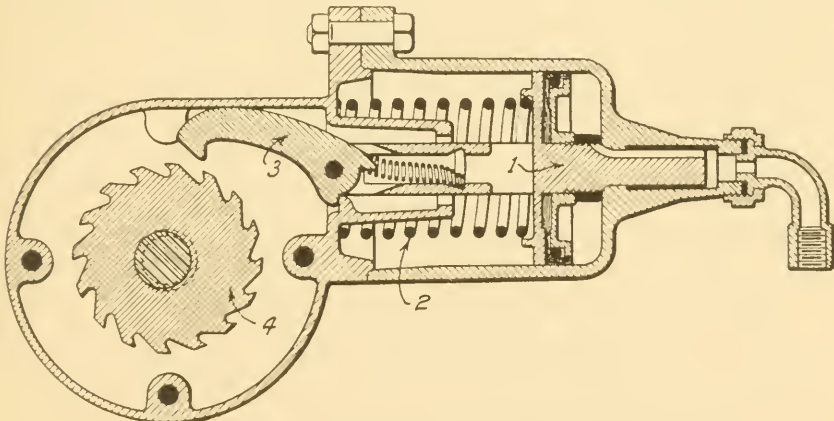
Part Sectional View of Automatic Slack-Adjuster
